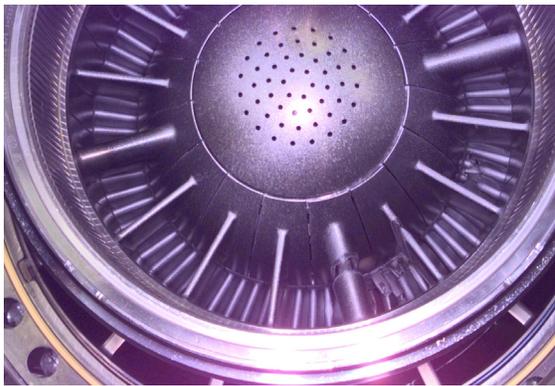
1 Inlet Dome, Eroded TIH Struts #14 and 15 and Damaged 1st Stage Vanes
